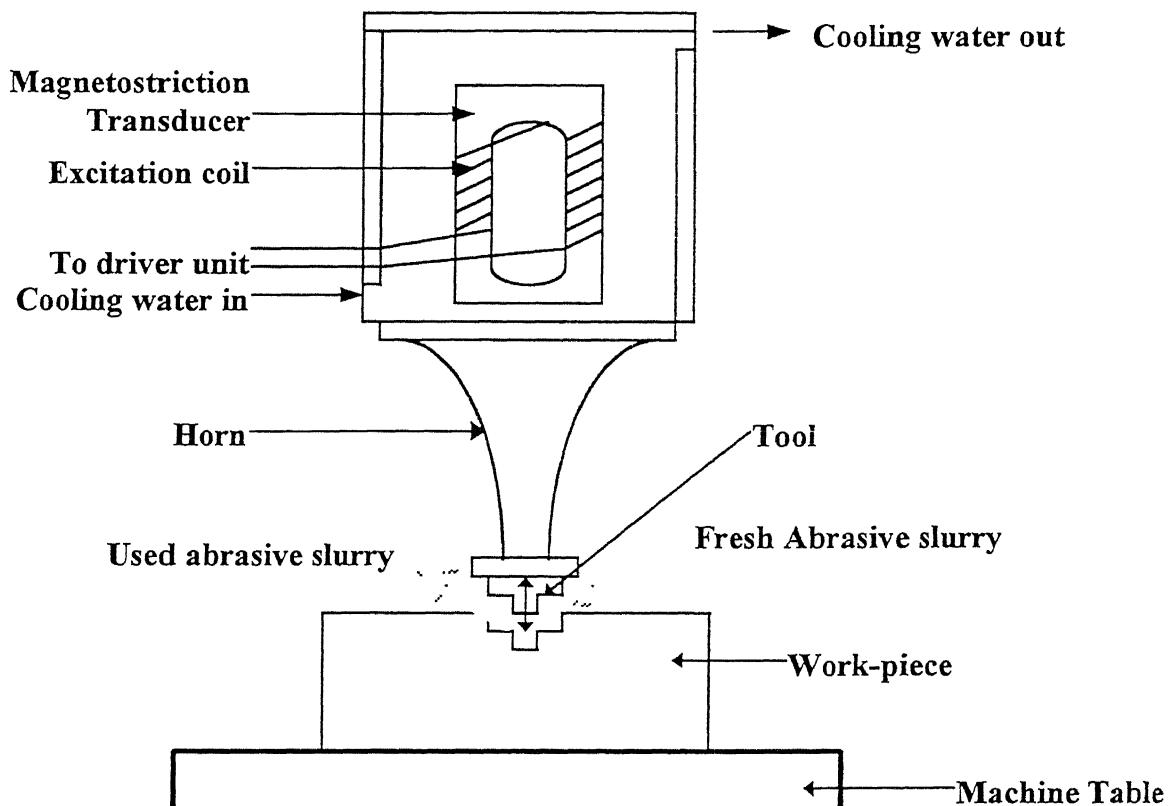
A schematic layout of Ultrasonic Machining Process
